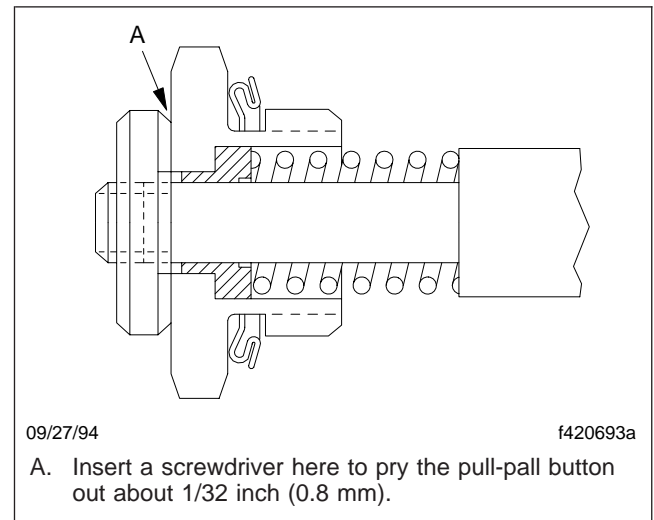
, Pull-Pawl on Meritor Automatic Slack Adjusters
